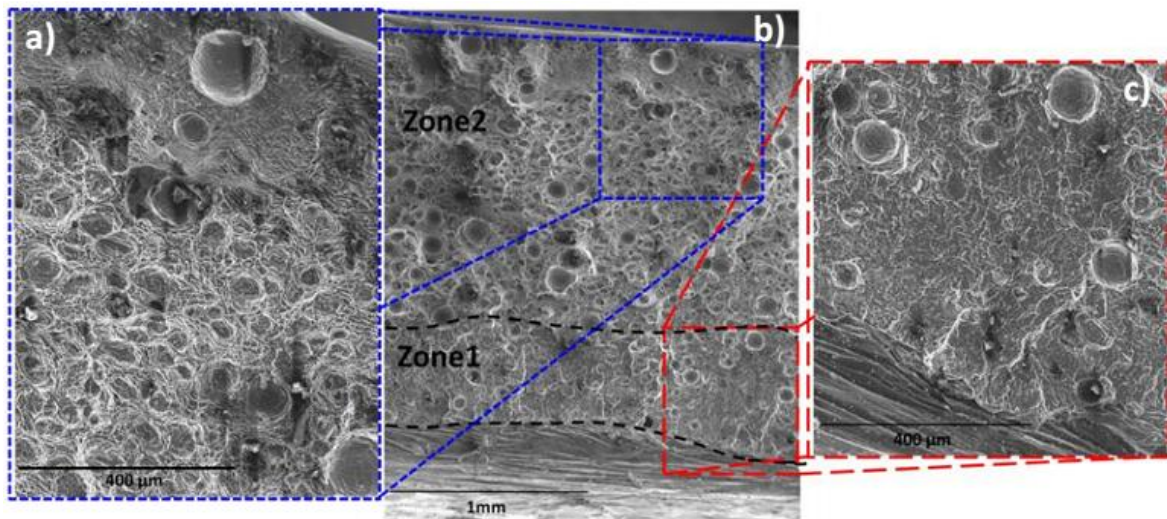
Aspect of the fracture facies after fatigue failure, showing the crack propagation zone along the interface (zone 1, (c)) and the crack propagation zone into the weld (zone 2, (a)).
